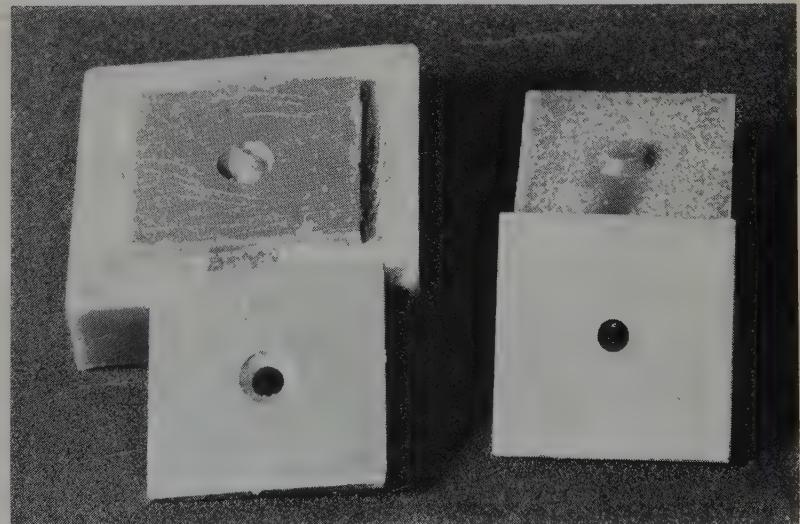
, close-up details on top plate. Top left, plate still attached to cured resin from reservoir block. Note how the resin shears off in the hole. Bottom left, the same view of the plate, removed from the resin block. Top right, unit removed from mold and plate. Notice the cone-like sprue left on the unit. Bottom right, same view of plate removed from unit.
